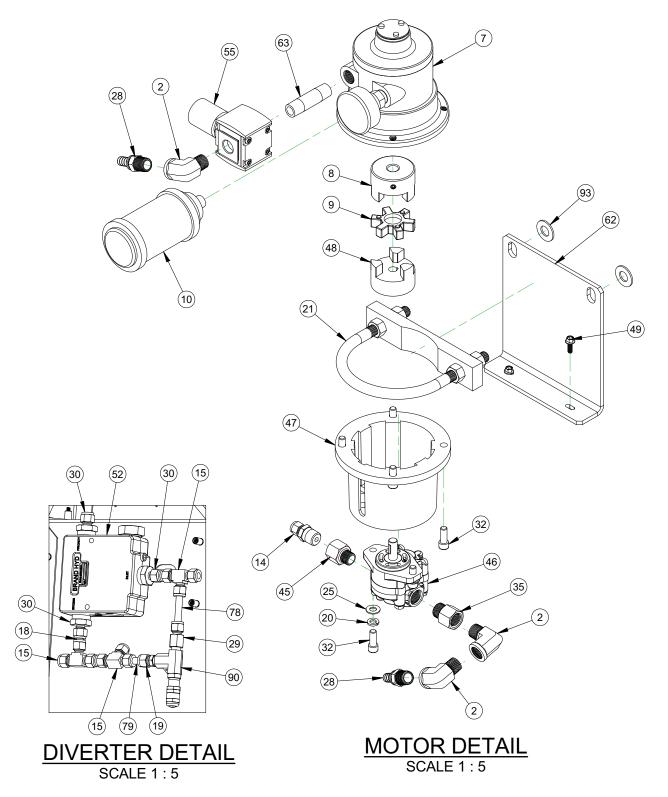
CONSOLE DETAILS ASSEMBLY (P/N 88479)
